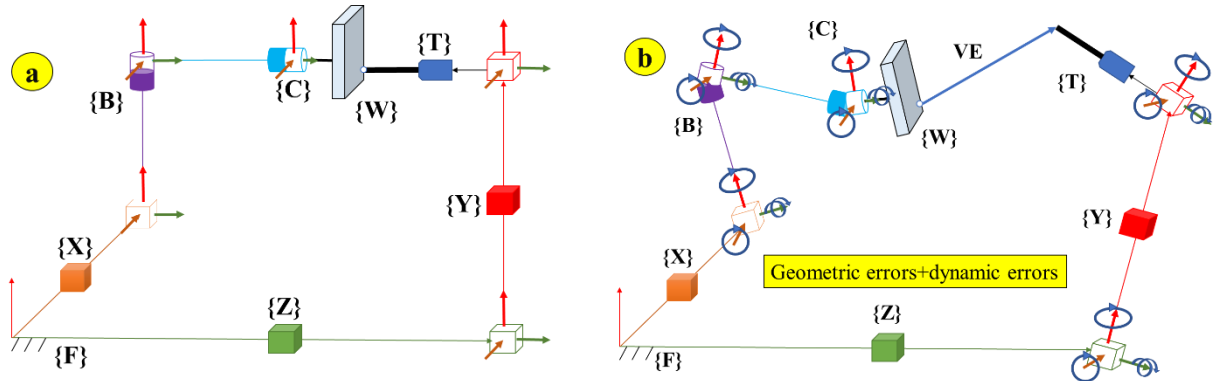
Machine tool volumetric errors, (a) Nominal machine error model of HU40-T five-axis machine tool; (b) Real machine error model containing the geometric errors and dynamic errors [54].
